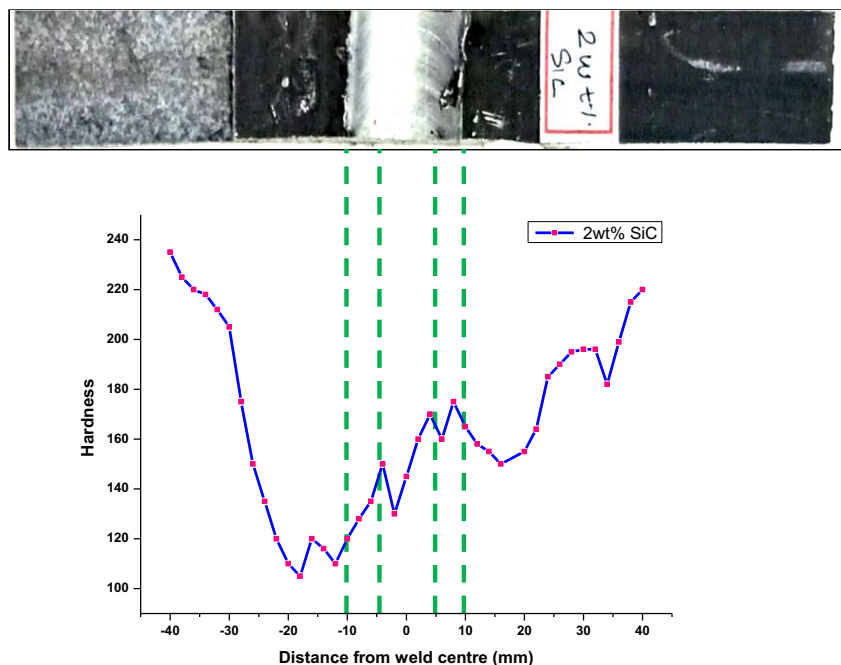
Vickers hardness for different wt% of modified interlock weld joints
